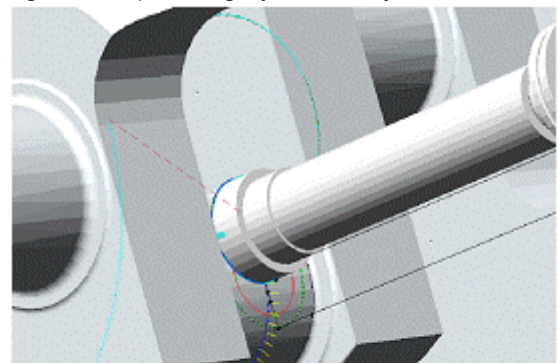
Turn-milling of a lifting pin with help geometry for tool alignment
